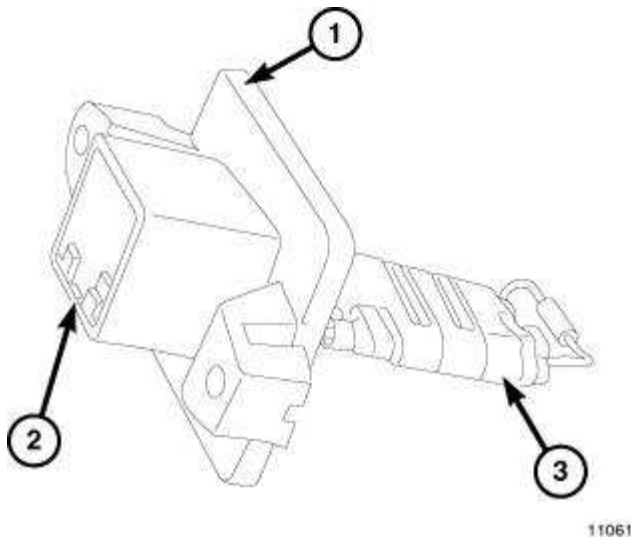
Blower Motor Resistor Consists Of A Molded Plastic Mounting Plate
